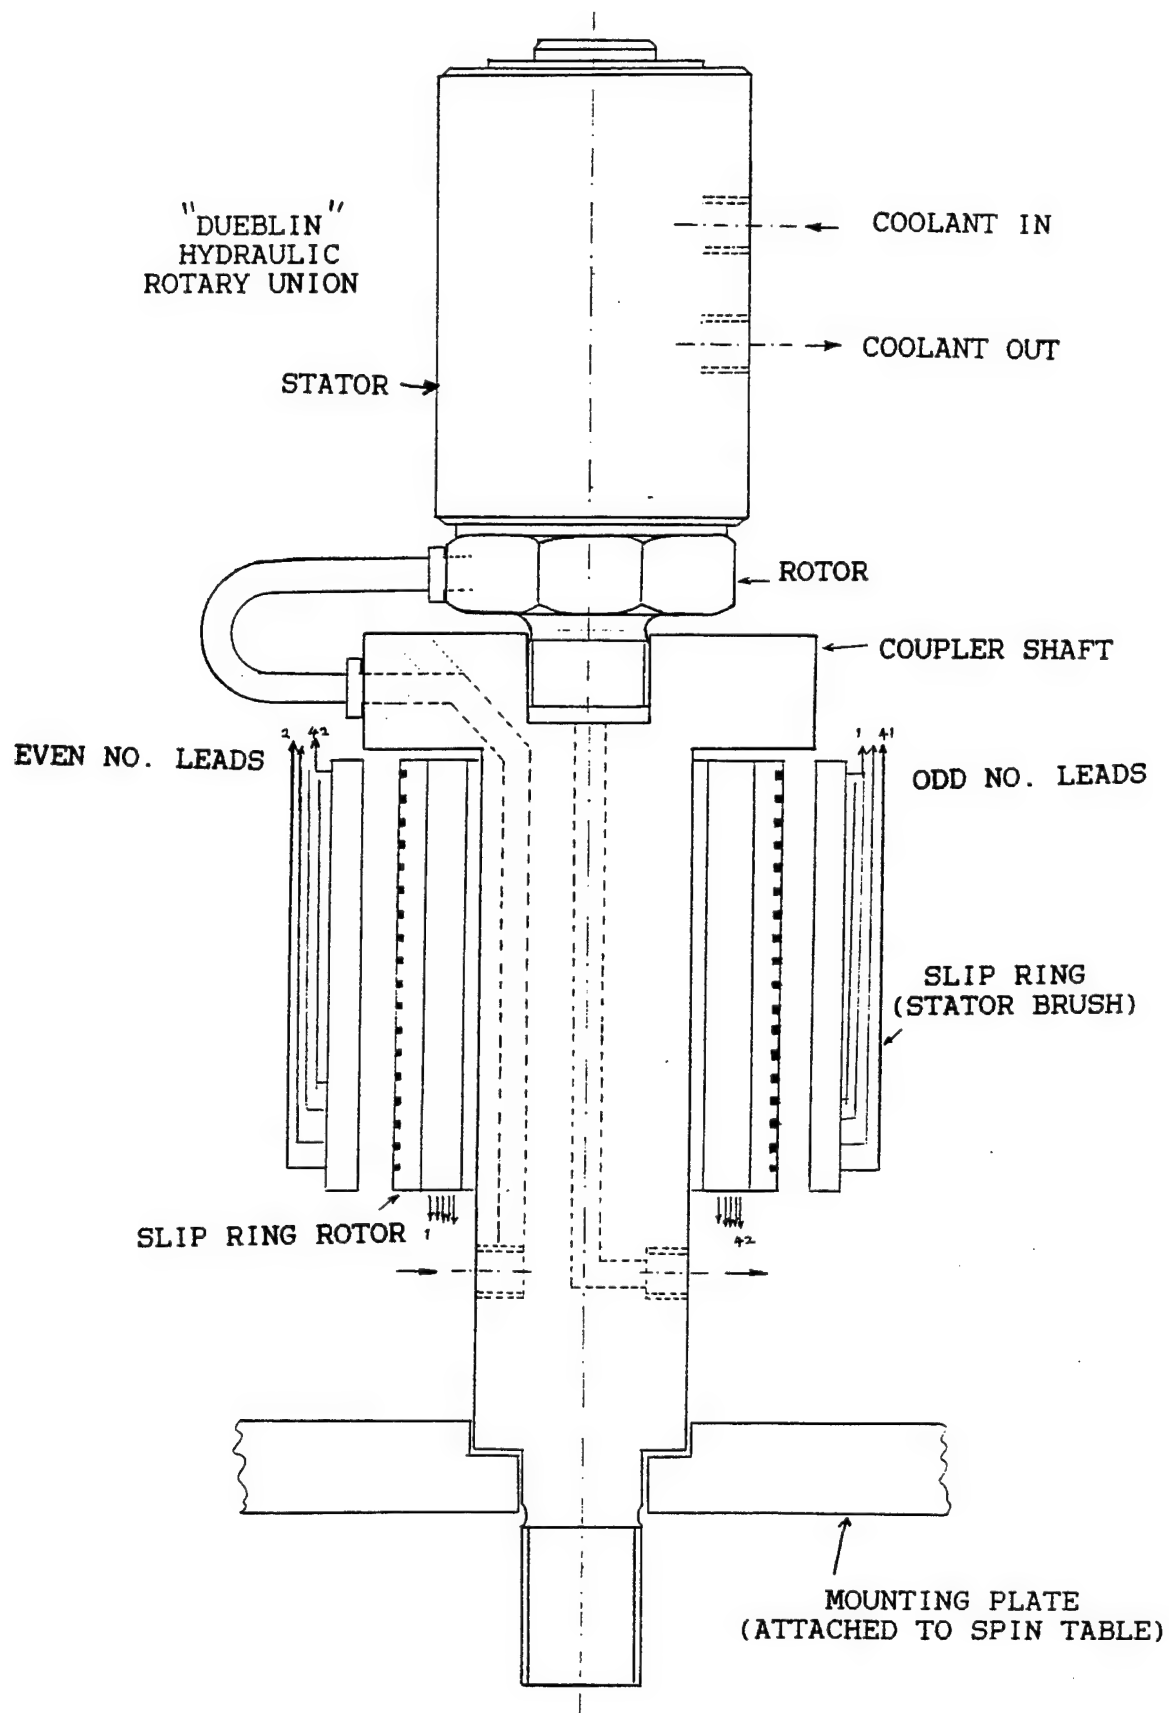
Slip Ring and Rotary Hydraulic Union Assembly for the Centrifuge Table.
